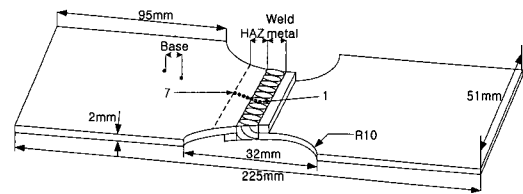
Dimension of tensile test specimen and Vickers hardness measuring points of welding zone on Lap joint specimen
